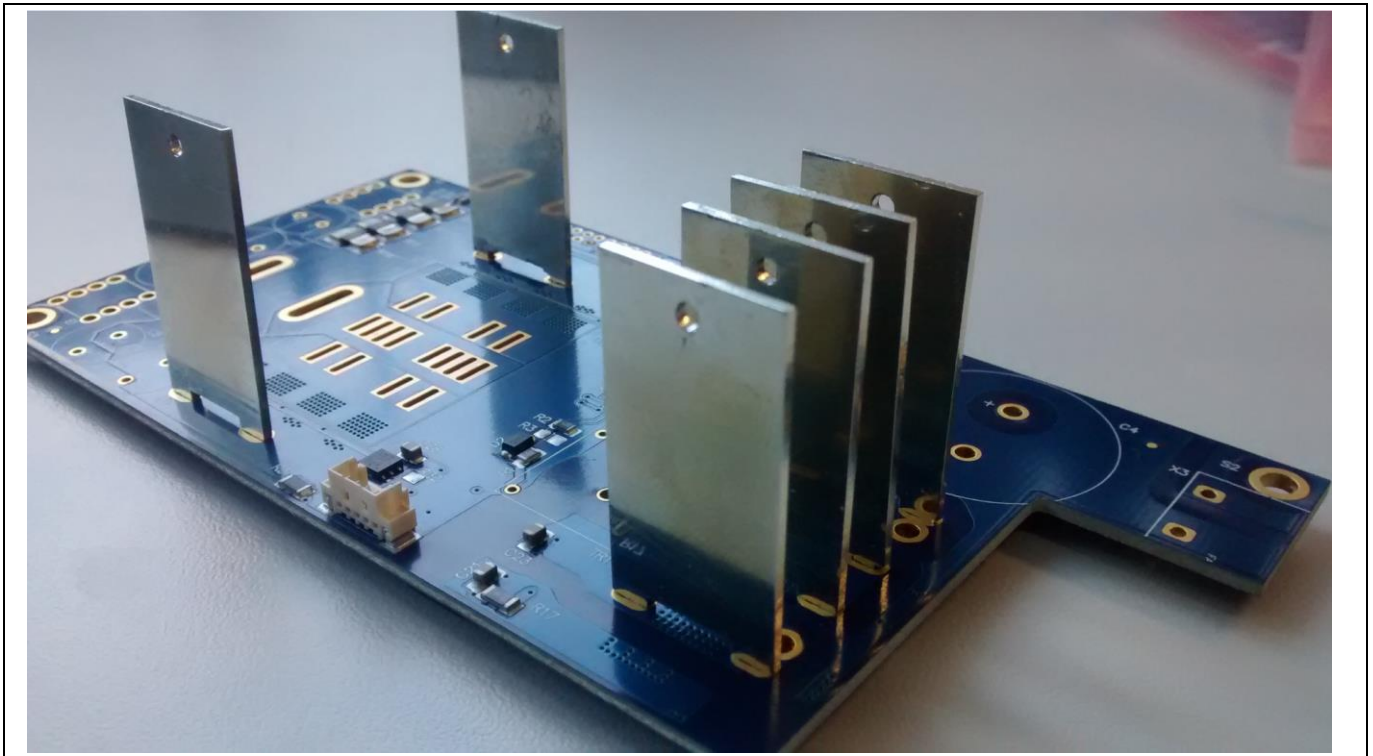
Heatsinks for HV bridge devices and LV secondary devices in a partially assembled 1400 W PSFB SMD converter board
